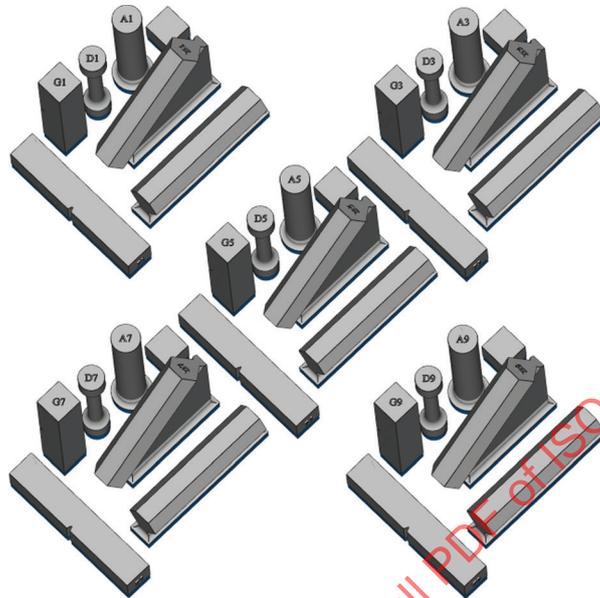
Example of tension test blanks and additional test specimens placed in five locations on a build platform
